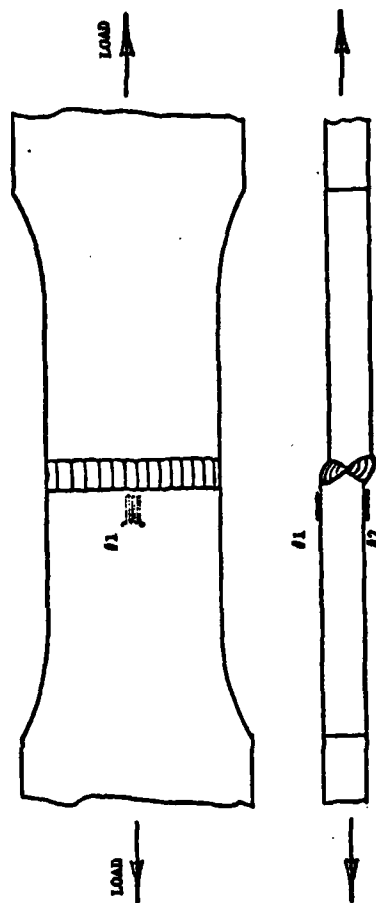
Typical Strain Gage Locations on Selected Welded Plate Static Tensile Specimens.
